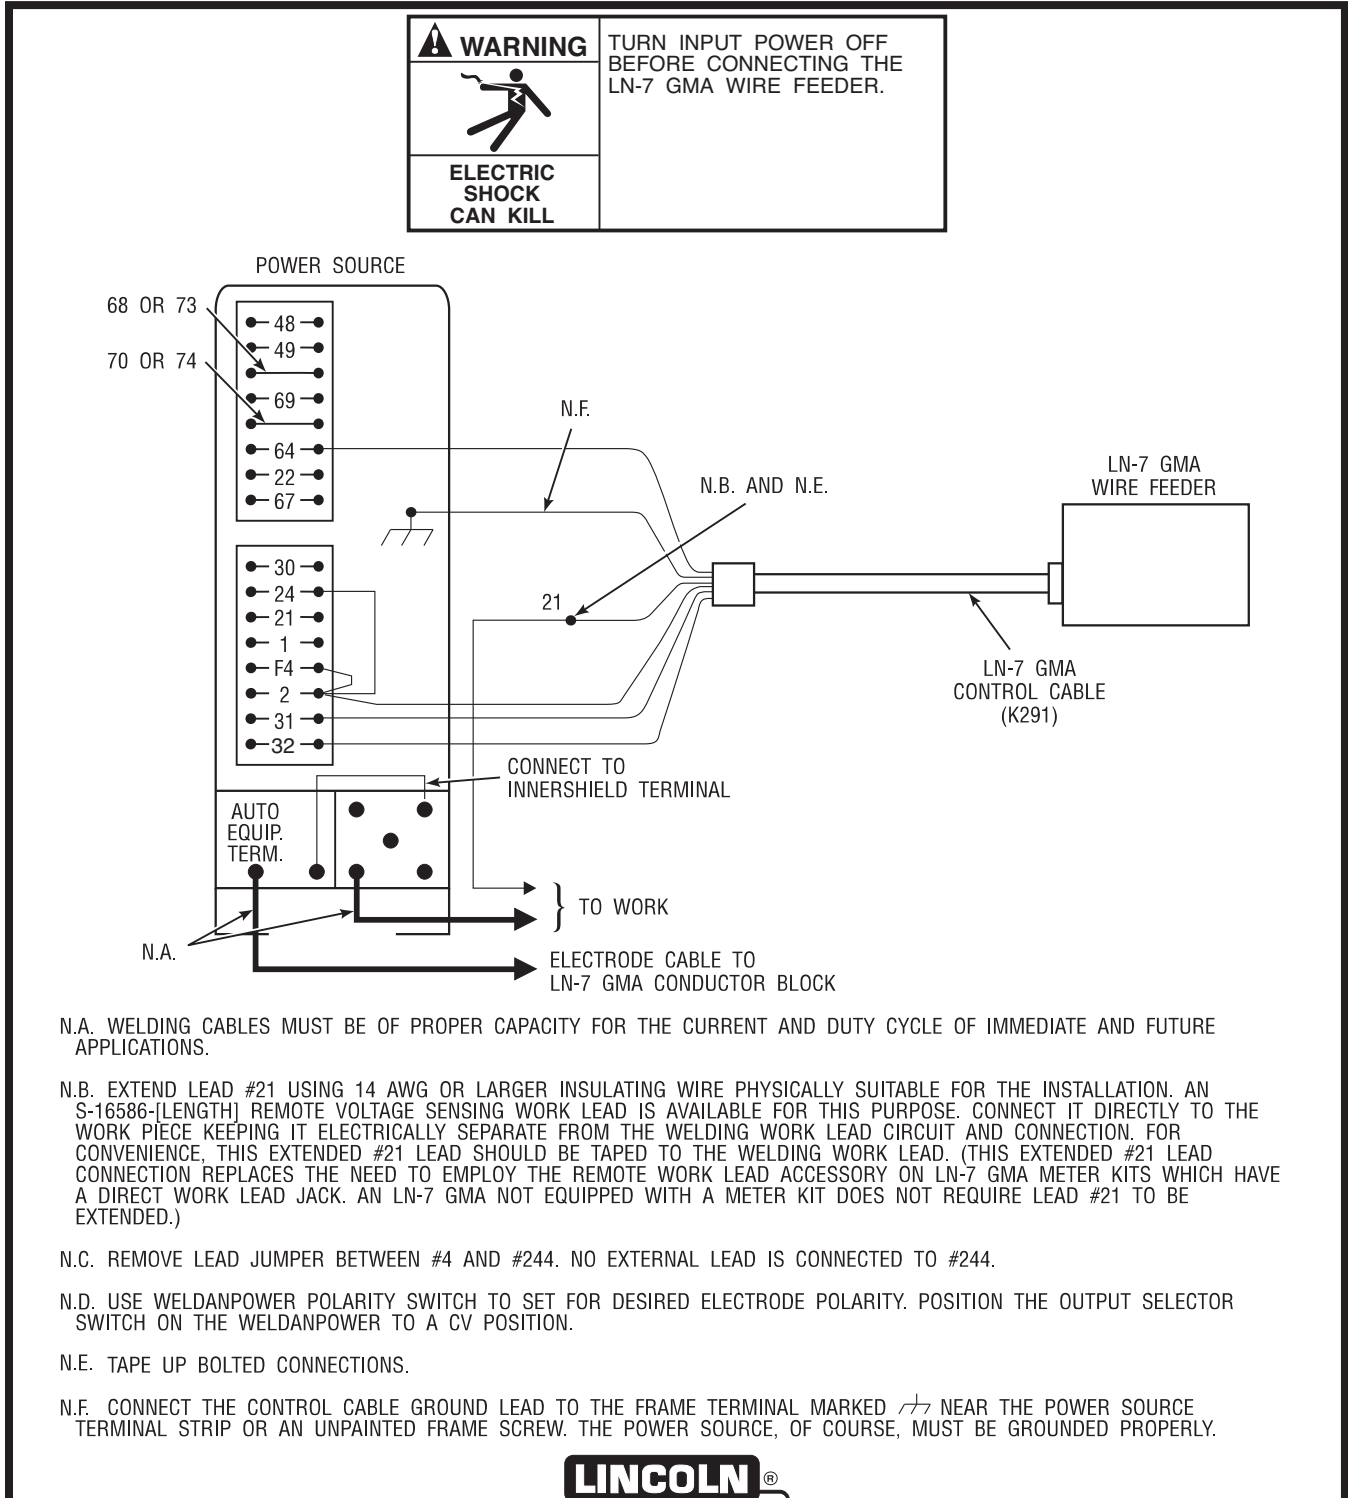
LN-7™ &amp; LN-7™ GMA TO R3S-400, 600, OR 800 - CONNECTION DIAGRAM
